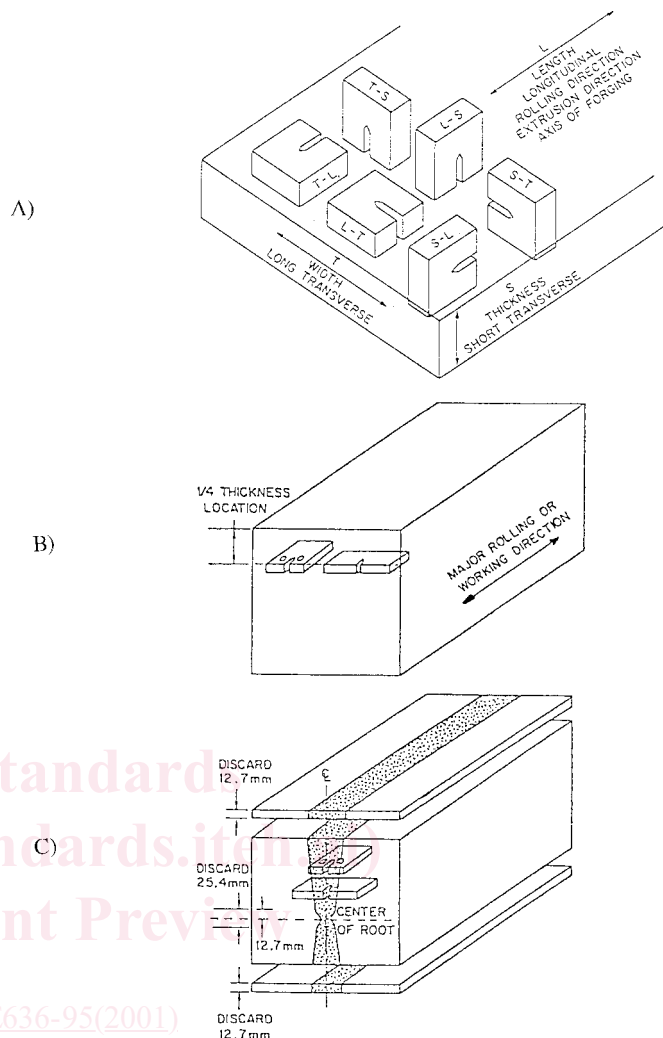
Specimen Orientation and Location in Plate, Forging, and Weld Deposit Materials: A) Crack Plane Orientation Code; B) Plate and Forging Specimen Location and Orientation; C) Weld Specimen Location and Orientation
